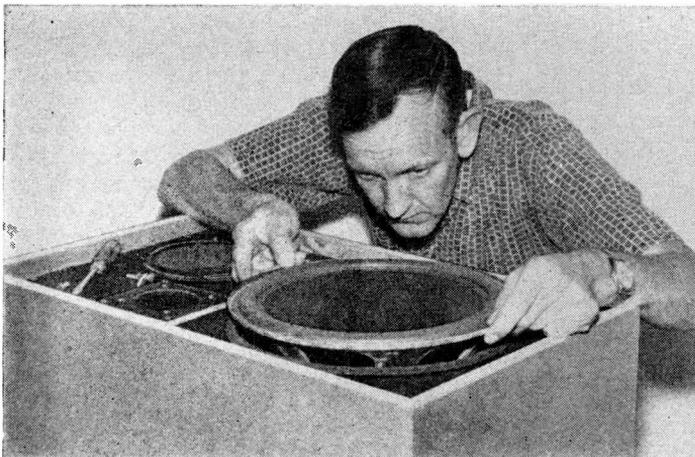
To insure proper air seal, be sure to place rubber, felt, or other adequate gasket material between speaker rims and speaker mounting board.
